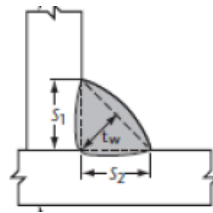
Fillet weld cross-section (CSA W59-13)
